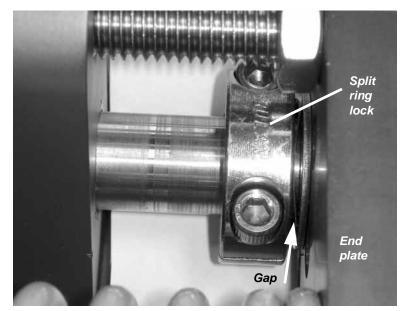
If there is a gap between the split ring lock and the end plate, you will need to adjust the slide to close the gap.
